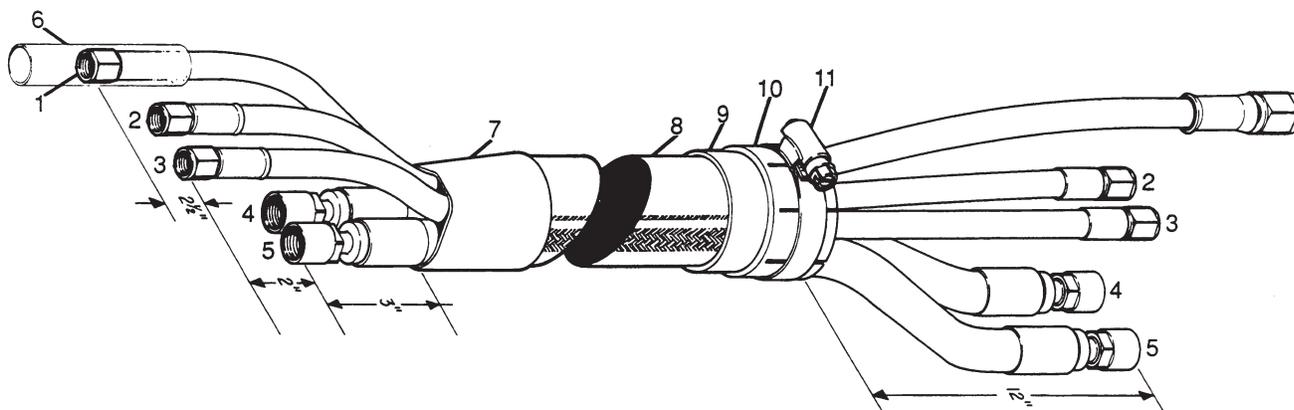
MAX200 Machine Torch Lead Set Assembly
